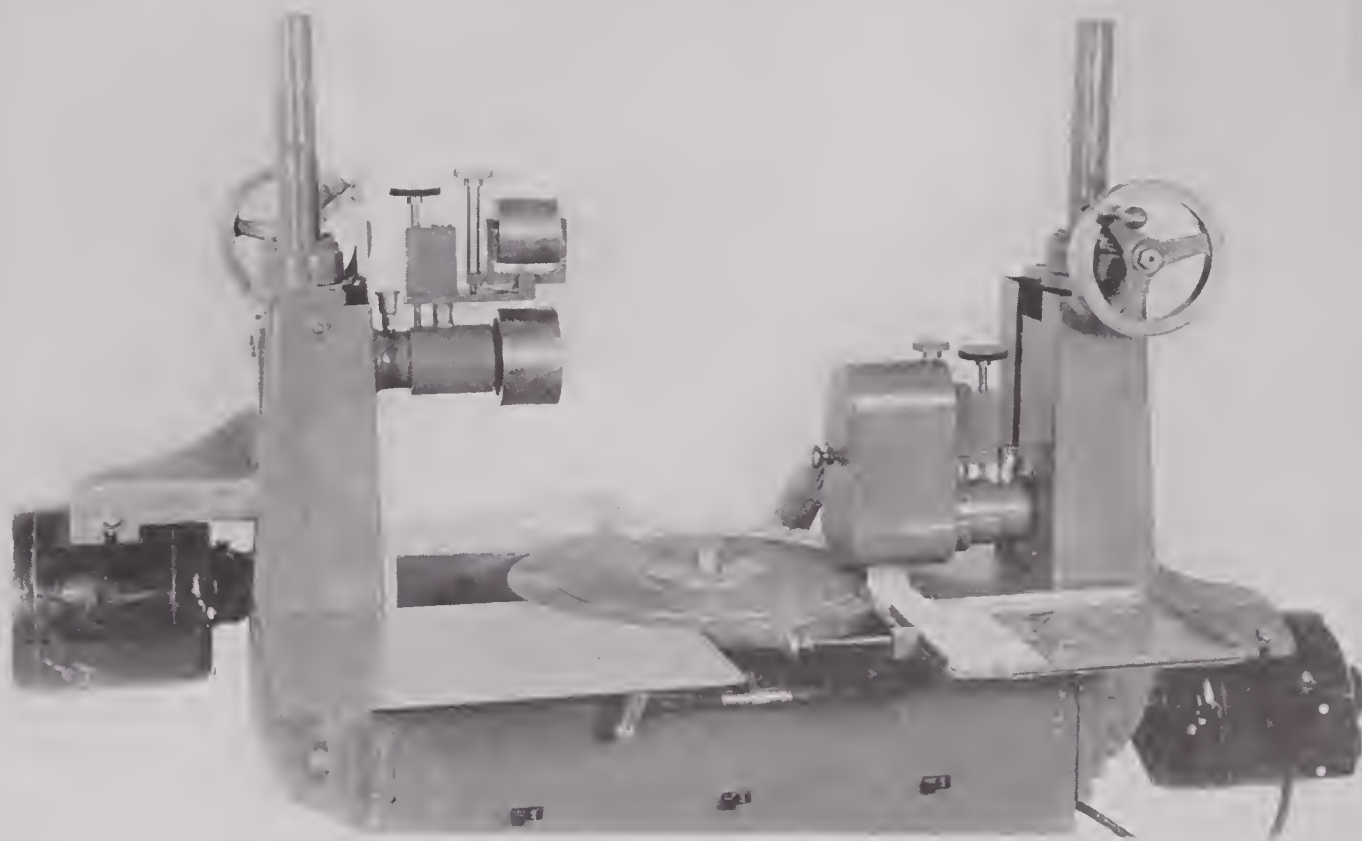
Production surfacing machine for crystal plates. For Rochelle salt, spiral milling cutters may be used; for ADP, sanding belts are used.
